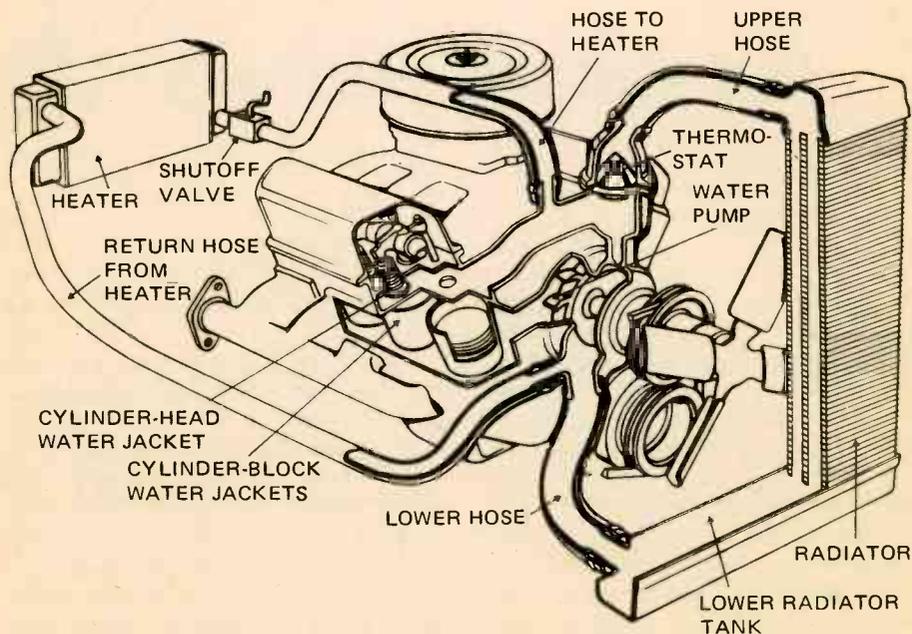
A CUTAWAY VIEW OF THE COOLING SYSTEM OF A V-8 ENGINE SHOWING HOSES THAT SHOULD BE CHECKED.
